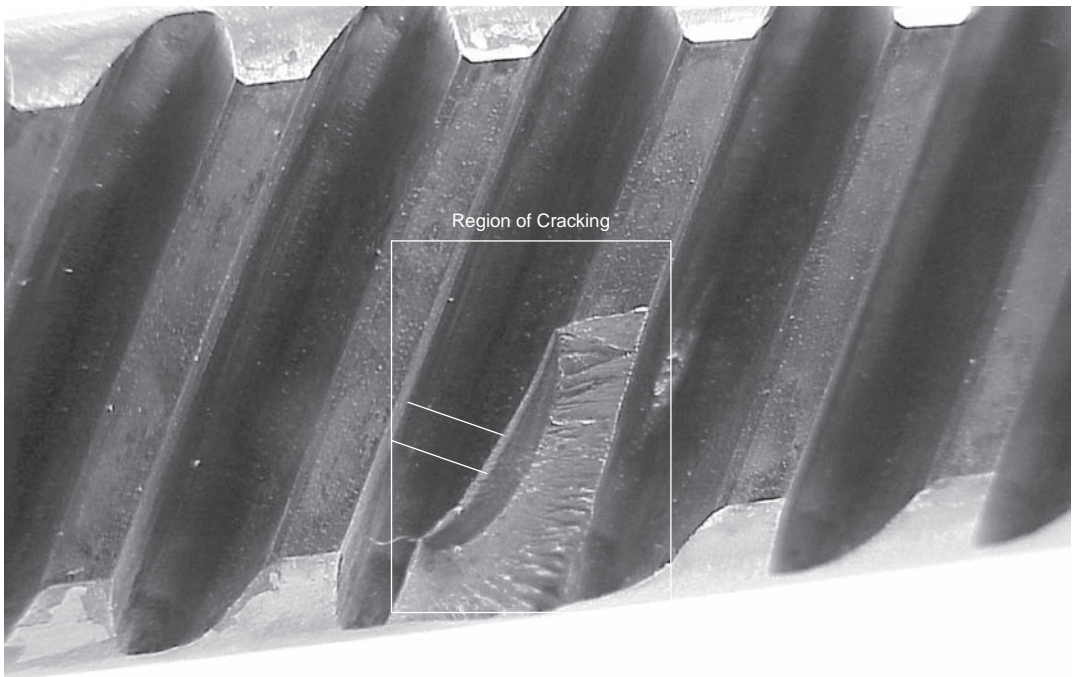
Overall view of the cracked pinion showing the location of the fracture and the presence of a discolored region
